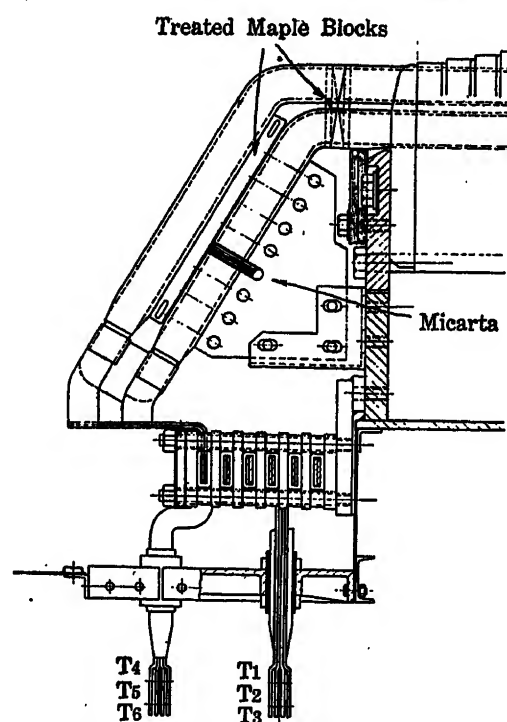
SHOWING METHOD OF BRACING COIL ENDS ON 22,000-VOLT GENERATOR
